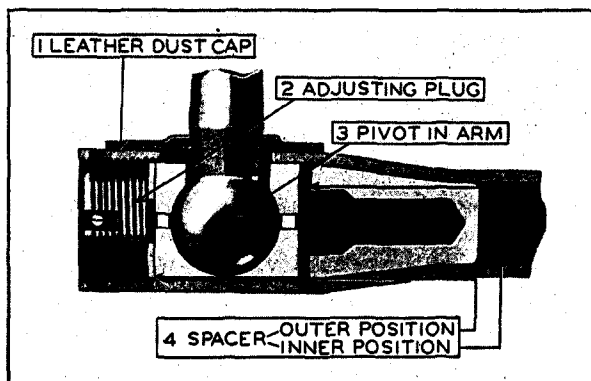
Sectional View of Ball and Socket Joints at Ends of Parallel Rod
